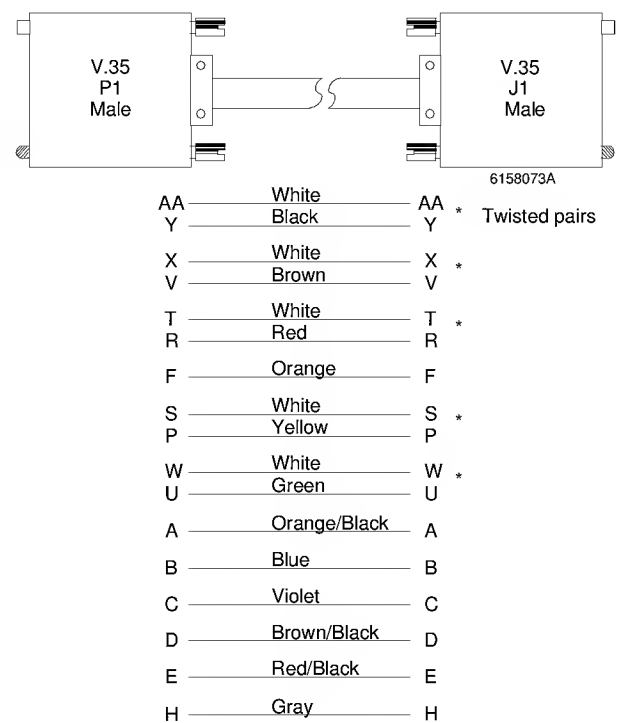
Cable, V.35 Extension; Male-to-Male, Shielded (DCA9A51A/CBE9051X)
